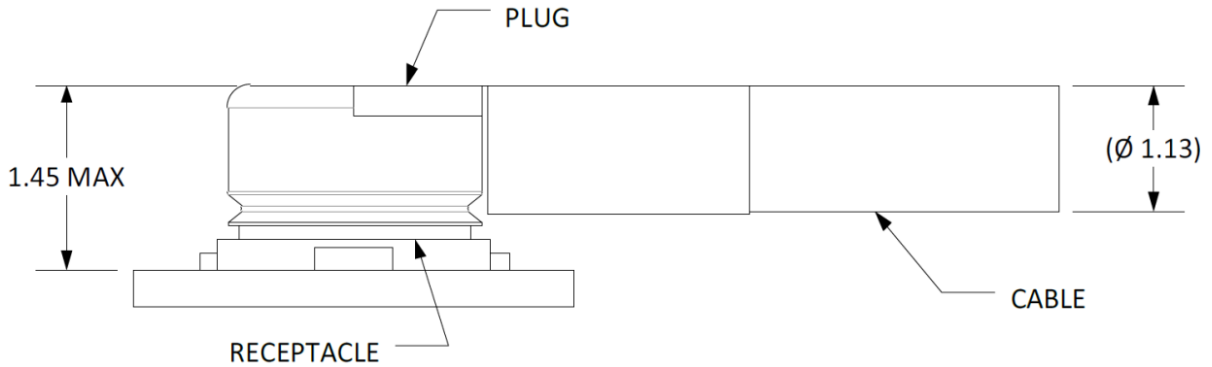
Connection between RF Connector and Mating Plug Using Ø 1.13 mm Coaxial Cable
